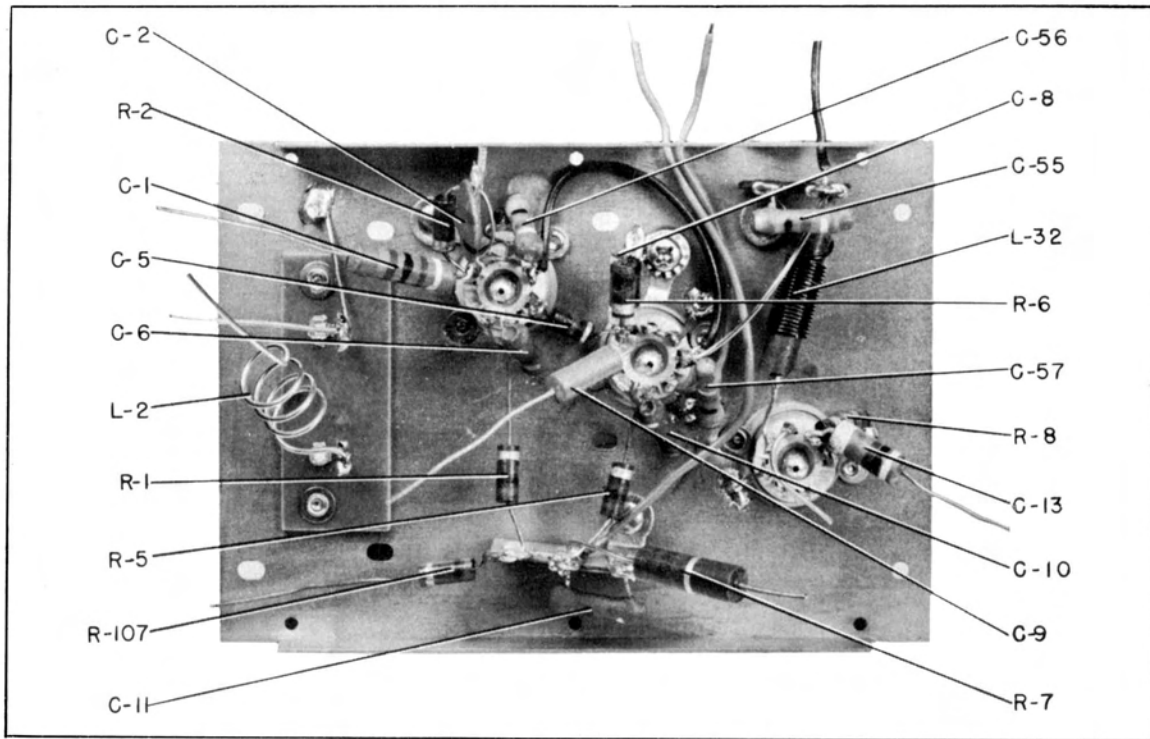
Bottom View of R.F. Unit (switch assembly removed)
